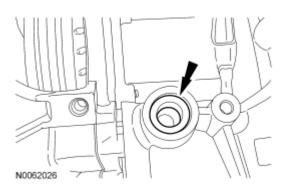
Identifying Transmission Fluid Cooler Tube Bolt Courtesy of FORD MOTOR CO.
